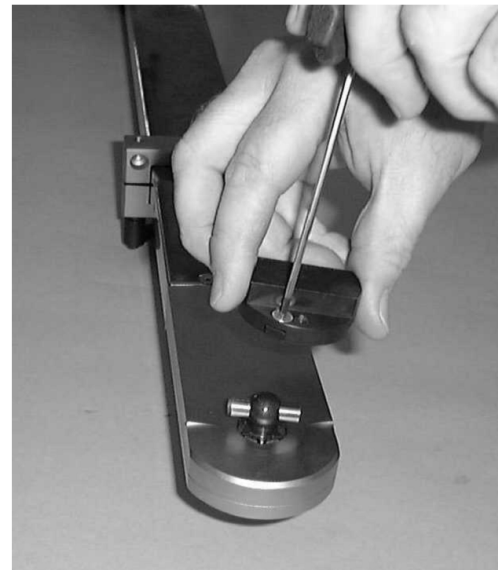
MOUNTING OF BALL JOINT COUPLING TO MACHINE SPINDLE
